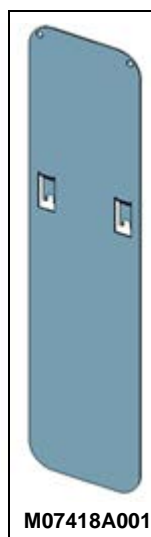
Encore Bezel Door Four-boot Metal Blank Kits
